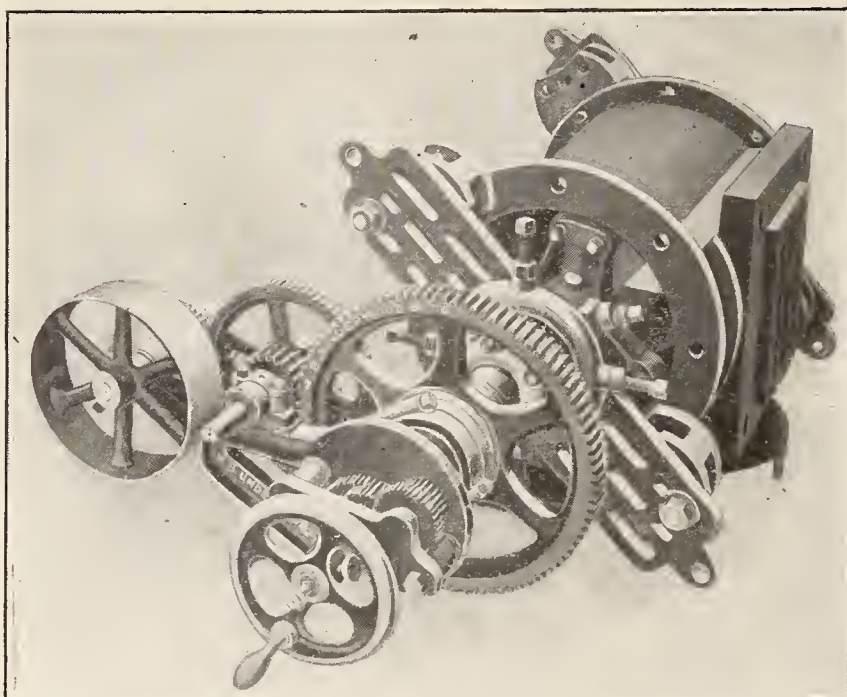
UNDERWOOD CYLINDER BORING MACHINE.
